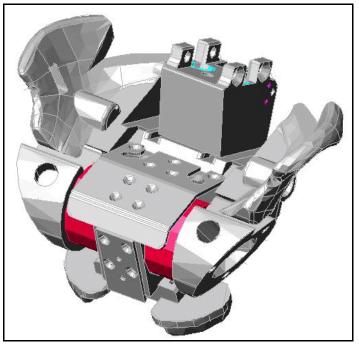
Attachment of Pelvis/Lumbar Mounting Bock to Pelvis
